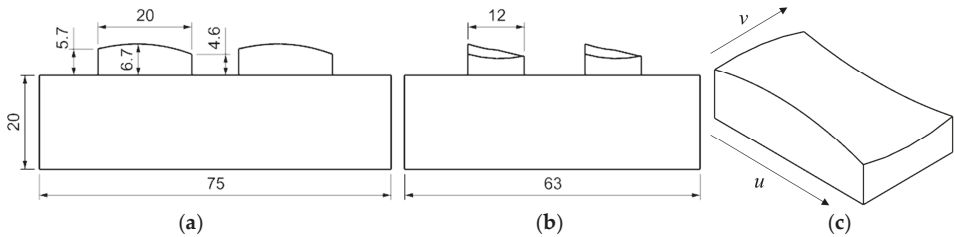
Design of Surface three; (a) front view; (b) side view; (c) isometric view.
